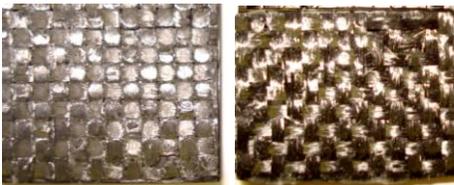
Typical fracture surfaces observed for (left) set “A” and (right) set “B” specimens, after shear test.
